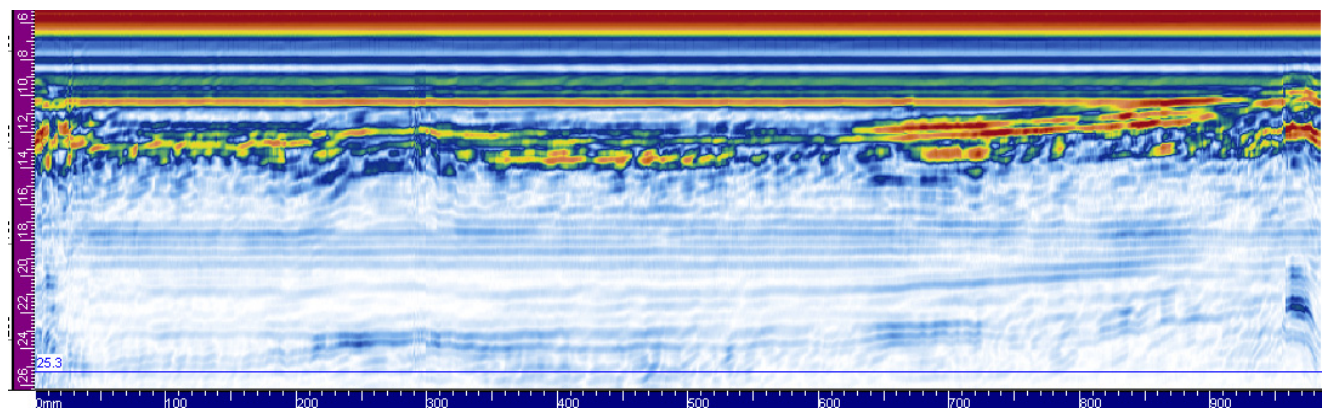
Typical scan of T-joint welded sample with cold weld flaw showing no evidence of a cold weld.
